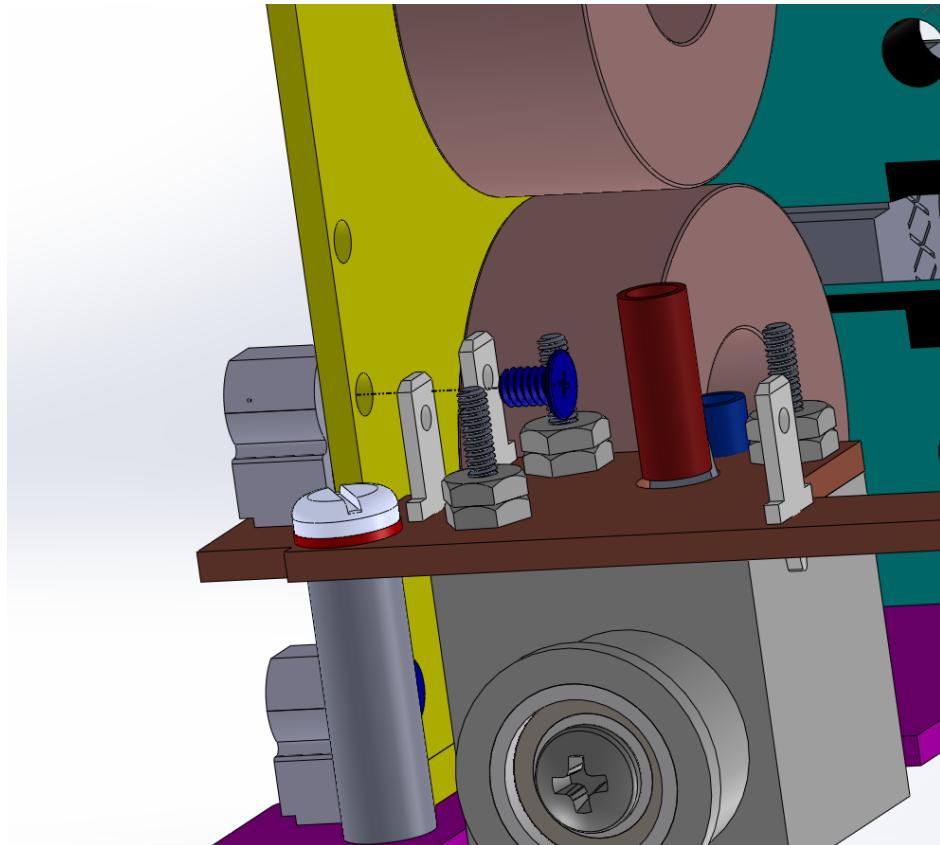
Use ONE M2 Board connection screw to connect the INNER FRONT of BPL to B2. To complete this step, you may need to bend the Wire Harness out of the way.
